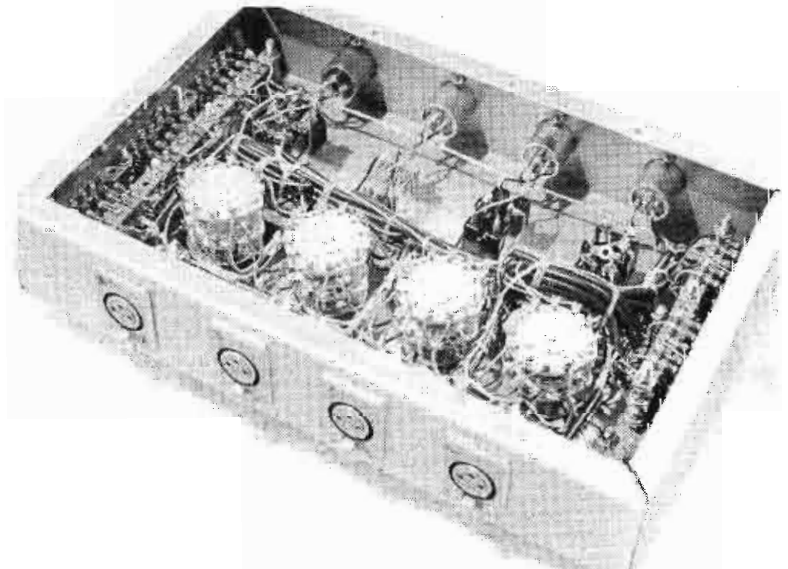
Internal view shows wiring and component layout. Resistors were hard-wired on boards for rigidity so that continued handling would not loosen the connections. Resistor boards were stacked because of the large quantity of resistors used. The non-shielded hook-up wire used is a 20-gauge. All wires were laced down to keep internal parts' movement to a minimum.
